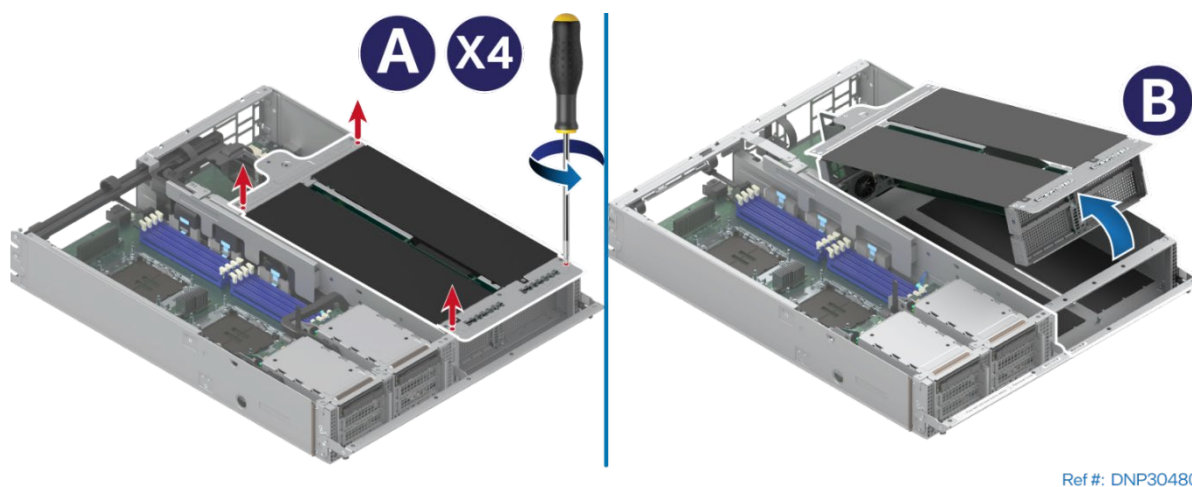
Removing PCIe Accelerator Module Riser Assembly
